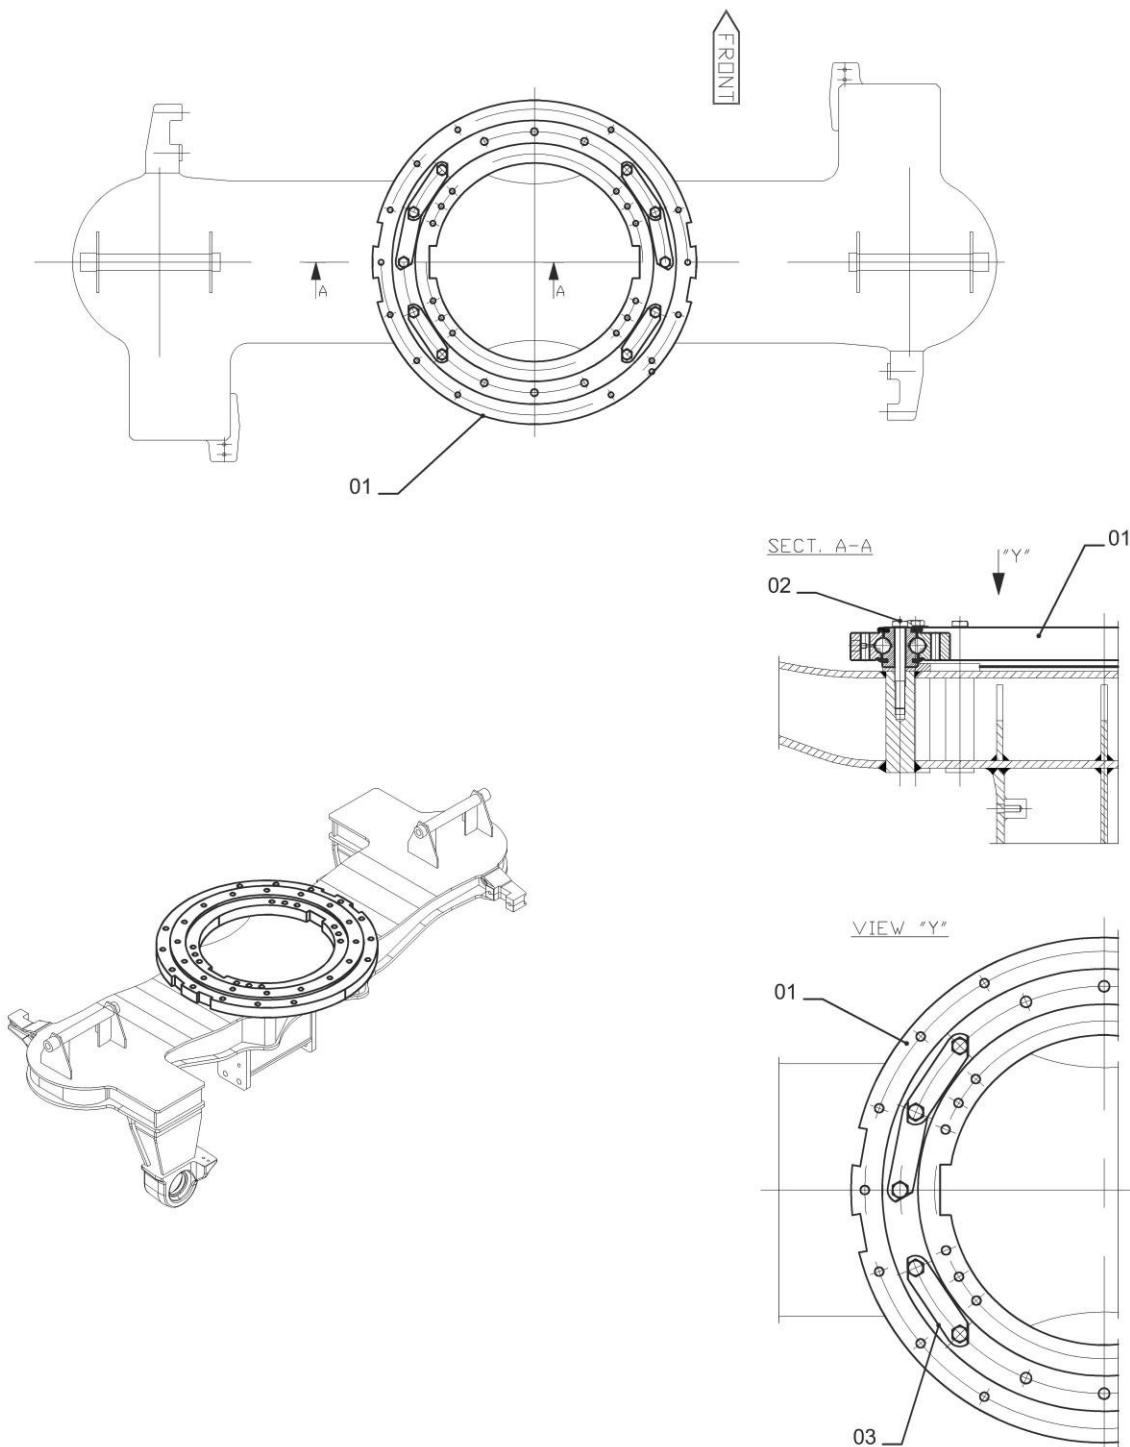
I-02.26 CT Ball Bearing Slewing Ring
